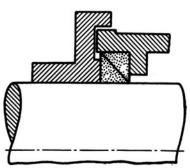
For slow speeds, two cork rings mounted as shown can be used. The set collar is sometimes counterbored and two small springs placed in the counterbore with a covering washer that bears against the sealing ring.
